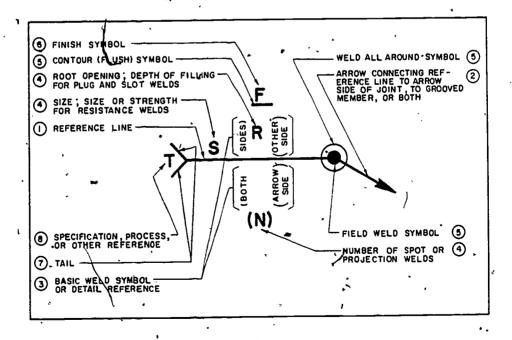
Standard location of elements on the welding symbol.
